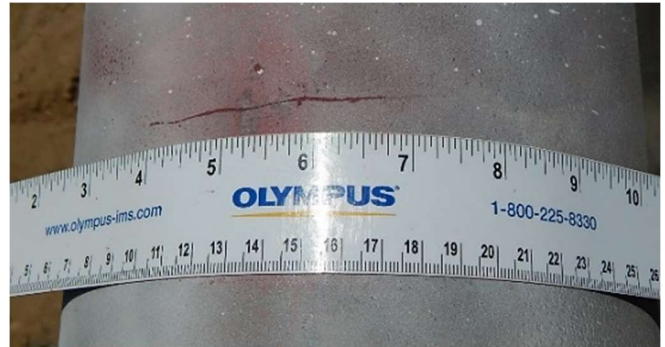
Axle with transverse cracks with contrast enhanced using magnetic particle testing.
